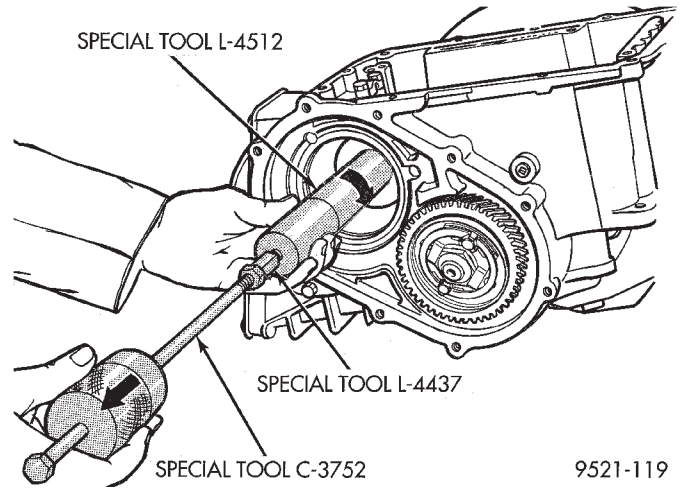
Remove Transfer Shaft and Bearing Retainer Assembly
